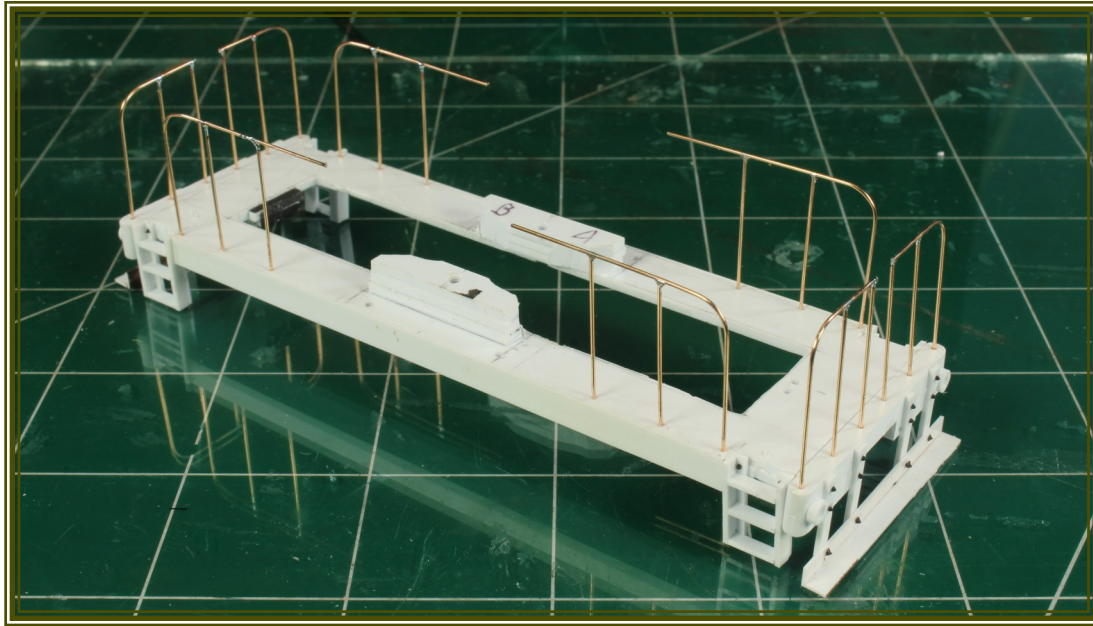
The railings were solders using a copy of the drawing as a template.
